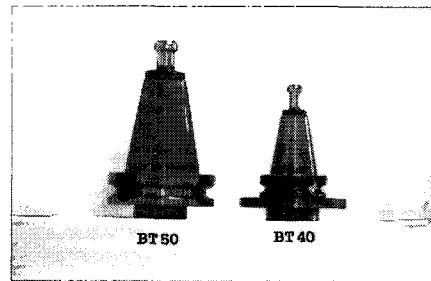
Tool adapters for attaching the polishing robot to a machining center
